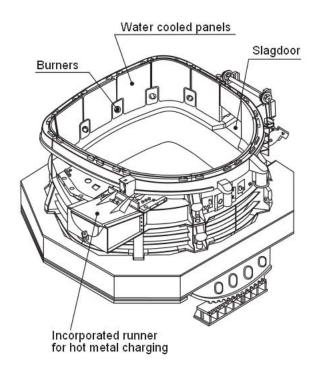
Shaft furnace bottom with runner for hot metal charging. (Courtesy of Paul Wurth, S.A.)
